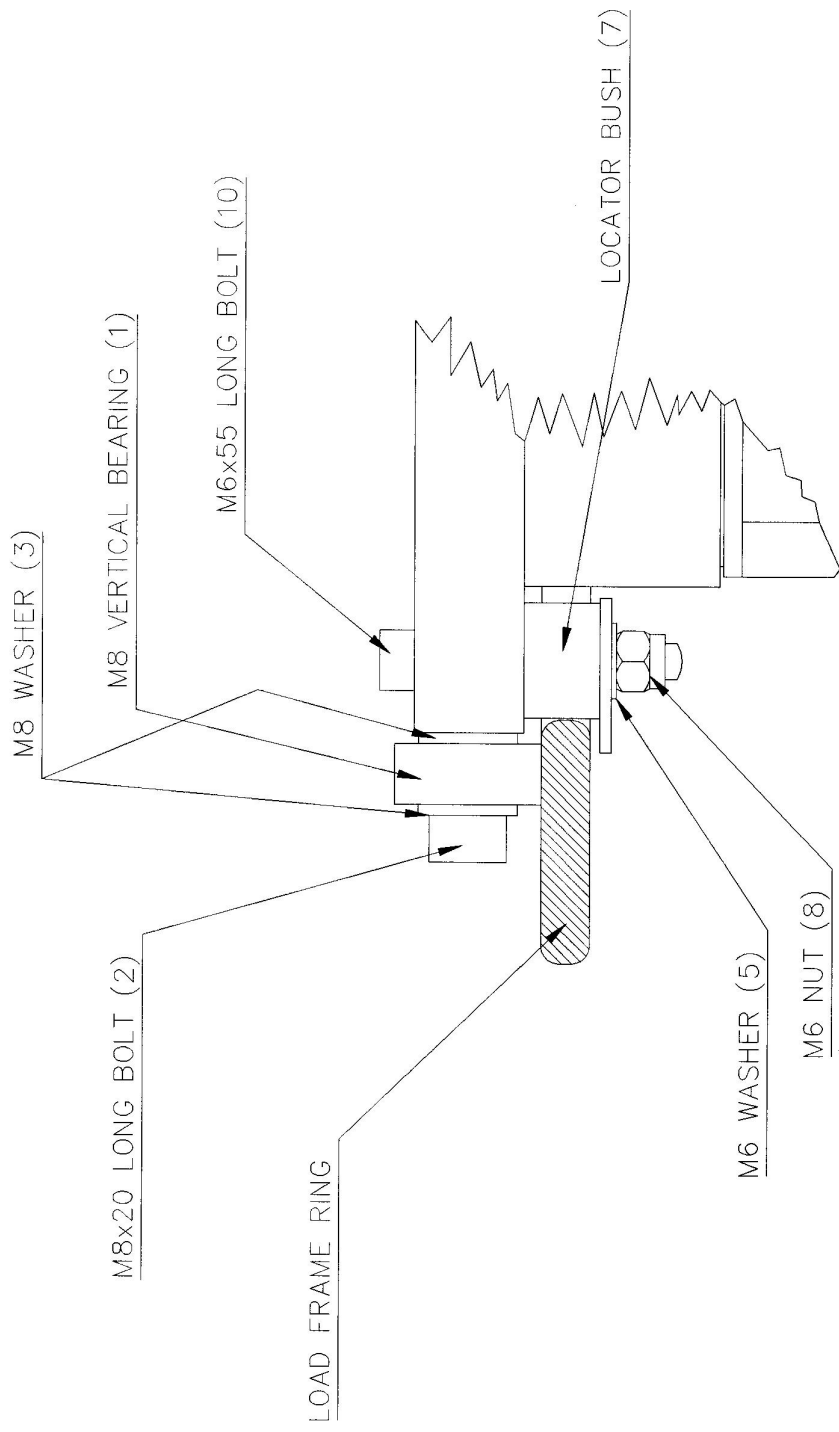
FRONT BEARING ASSEMBLY.
